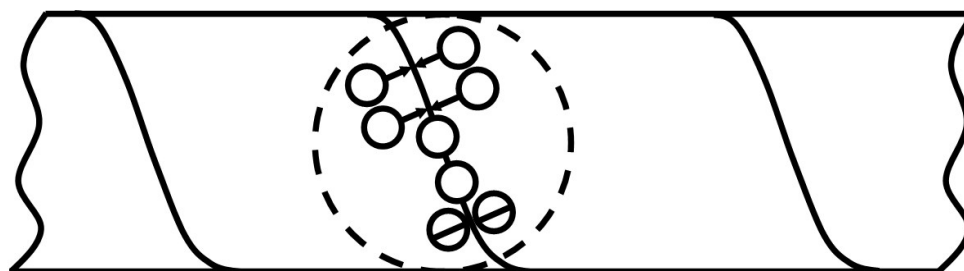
Online-Ultrasonic Weld Test directly after welding with six probes (4 longitudinal, 2 on-bead transverse, 2 laminations).
